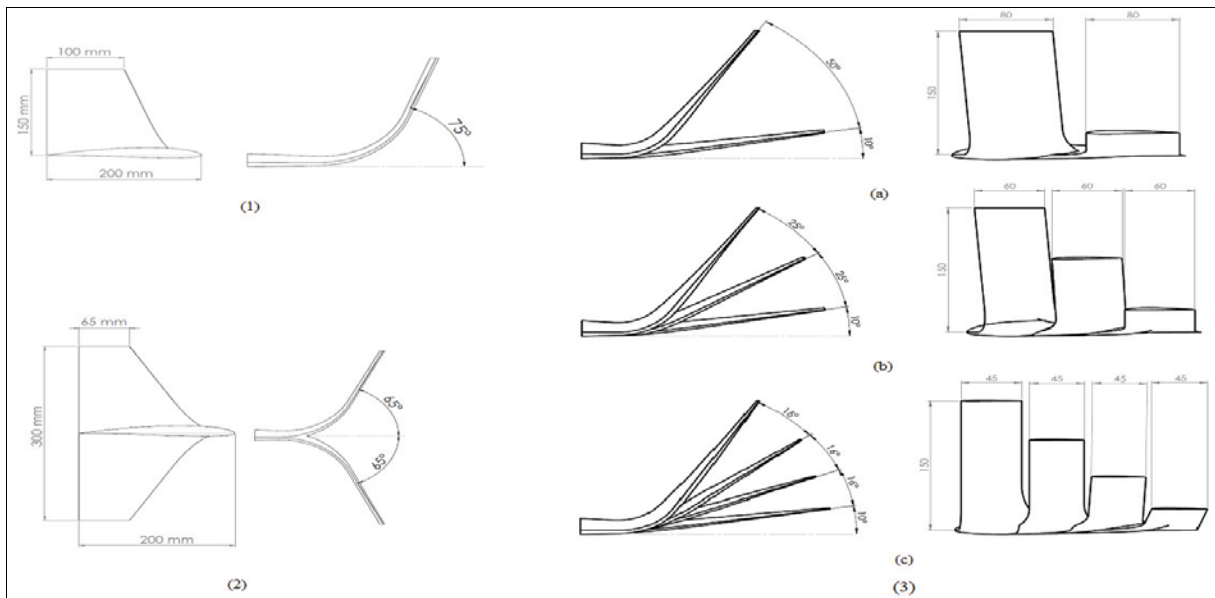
Different winglet designs 1. Blended (side view and front view) 2. BMAX (side view and front view) 3. a) Multi-tip-2; b) Multi-tip-3; c) Multi-tip-4 [19]
